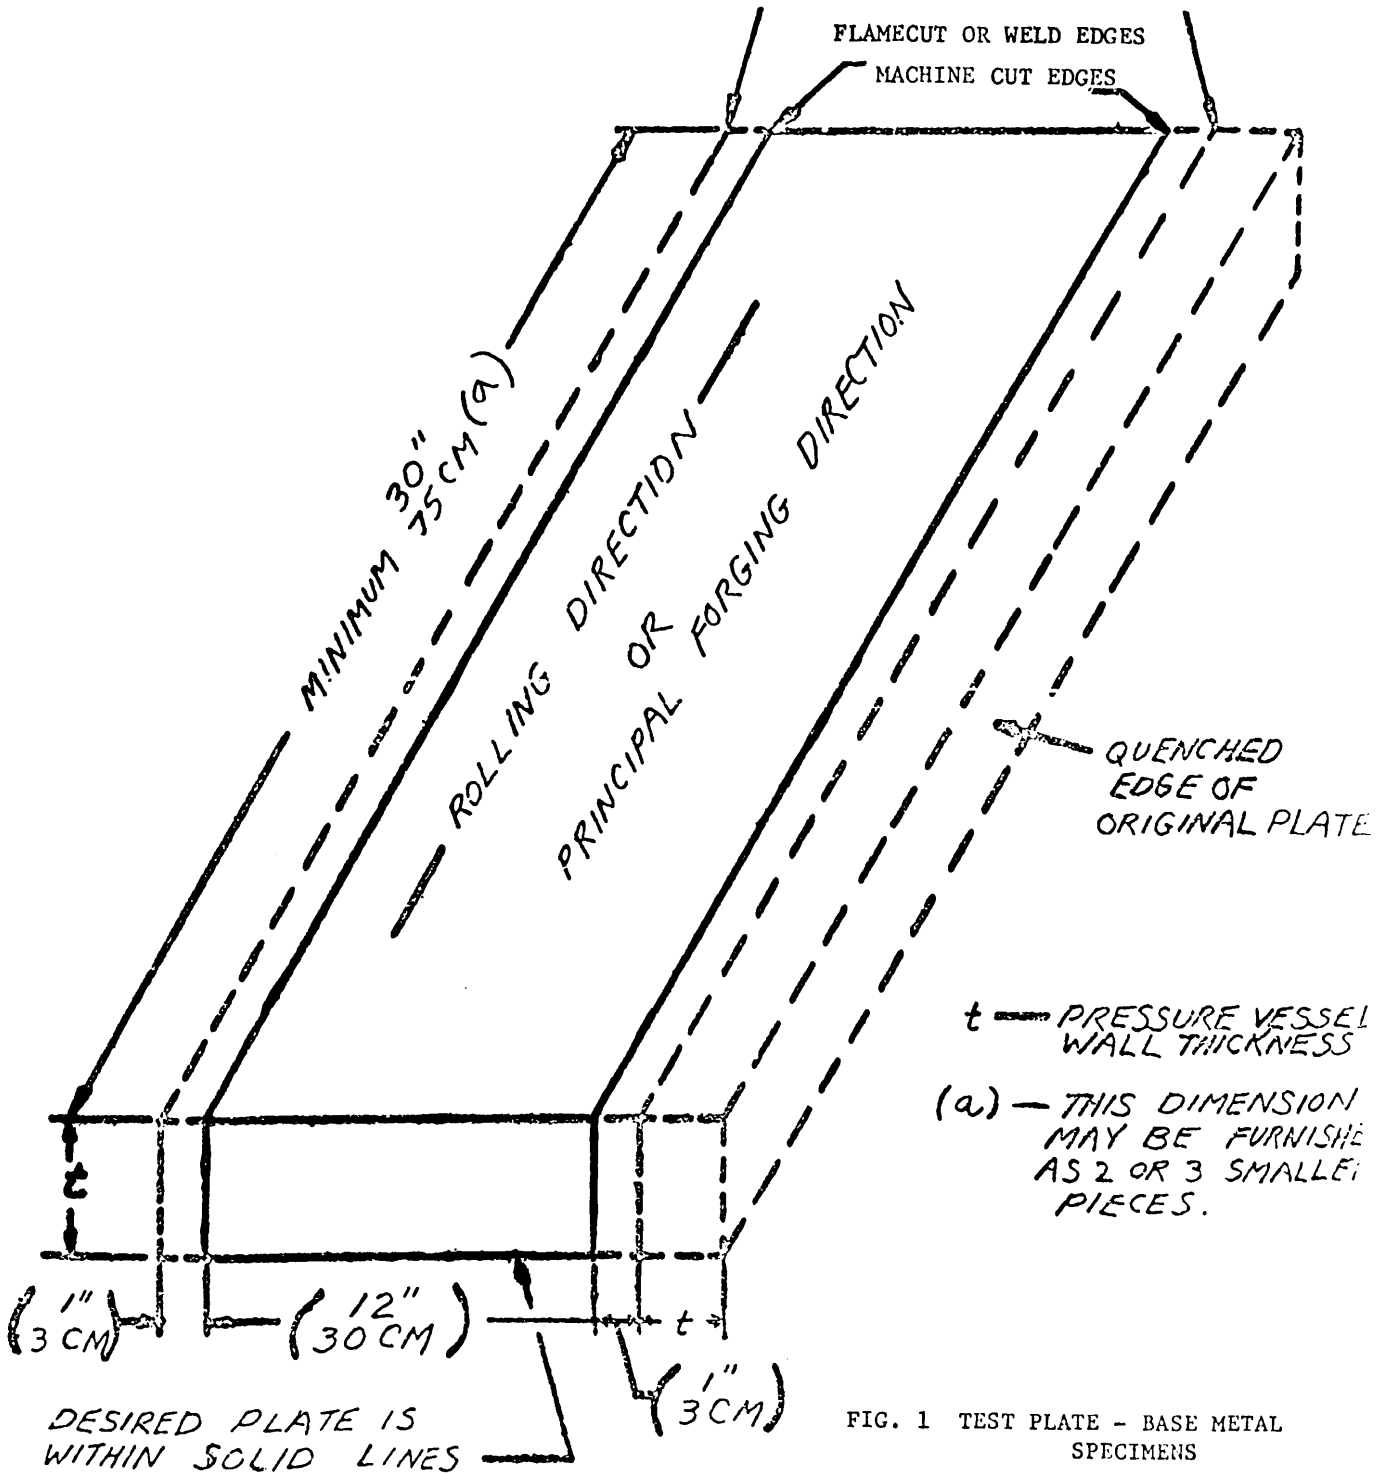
TEST PLATE - BASE METAL SPECIMENS
